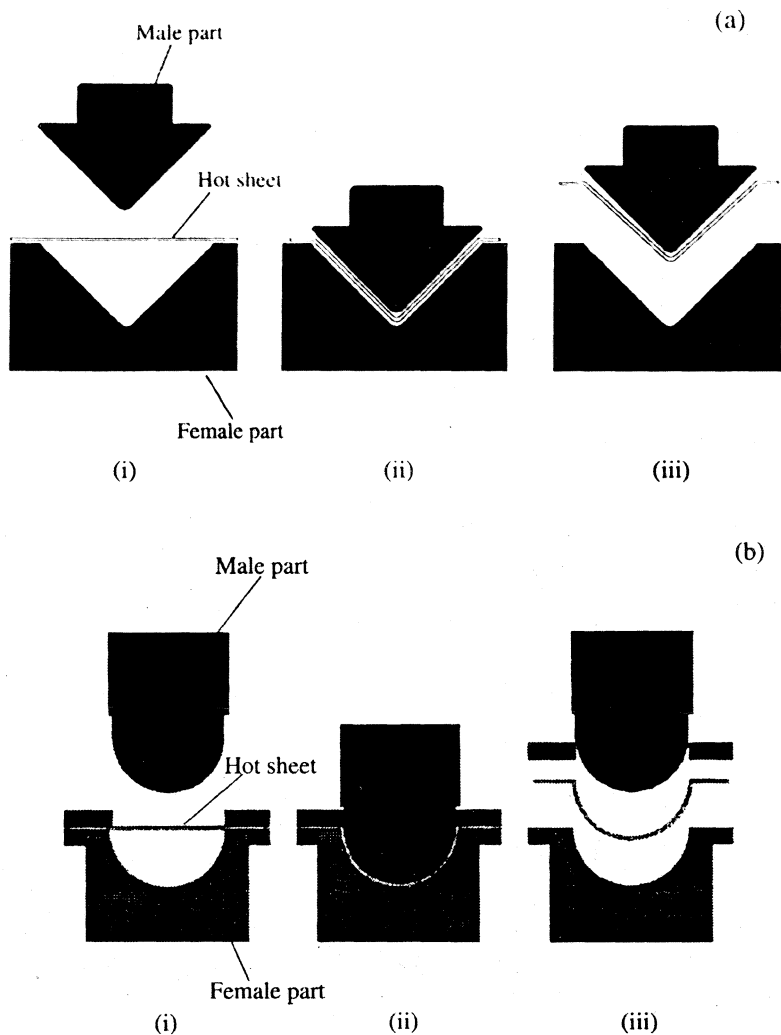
Stamp forming of the HAP-EVA sheet material into (a) V-form and (b) hemispherical form. (i) Pre-heated composite sheet placed over cold female mould, (ii) sheet formed by male part of the mould into female mould, and (iii) the male part of the mould withdrawn and material formed into the mould contours.
